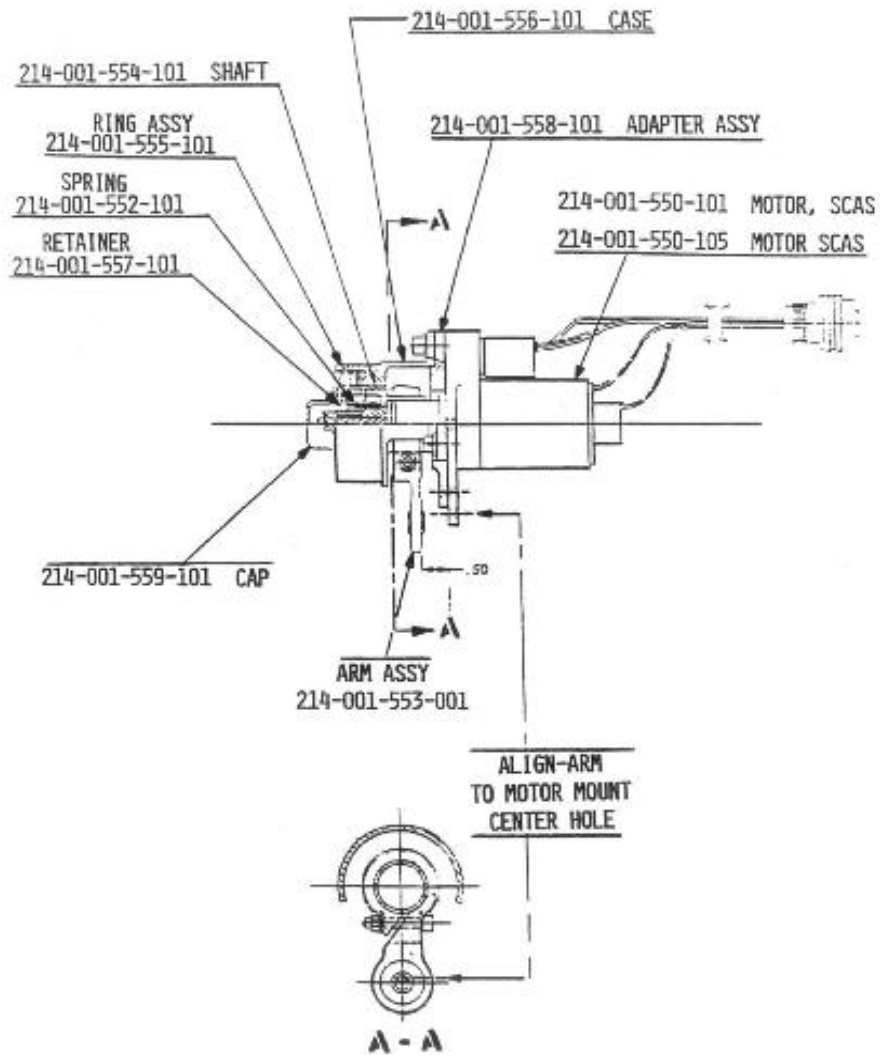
DRIVE AND CENTERING ASSEMBLY
